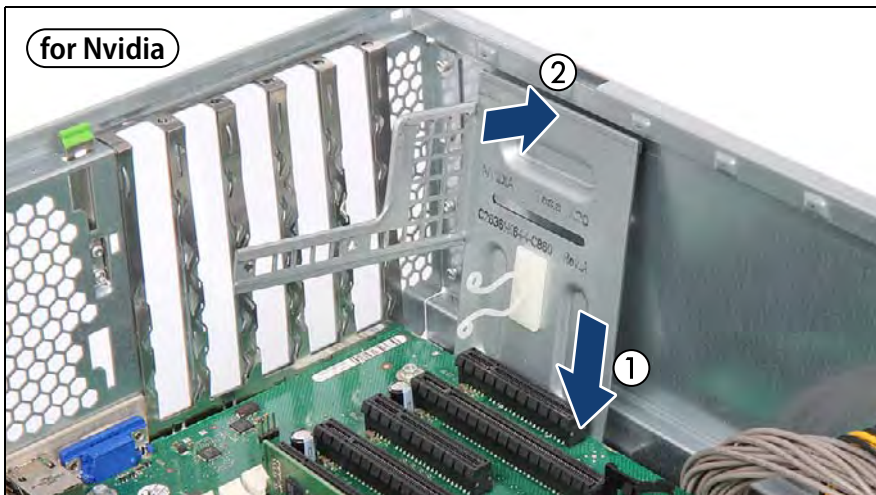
Installing the GPGPU card mounting bracket (Nvidia) (A)
